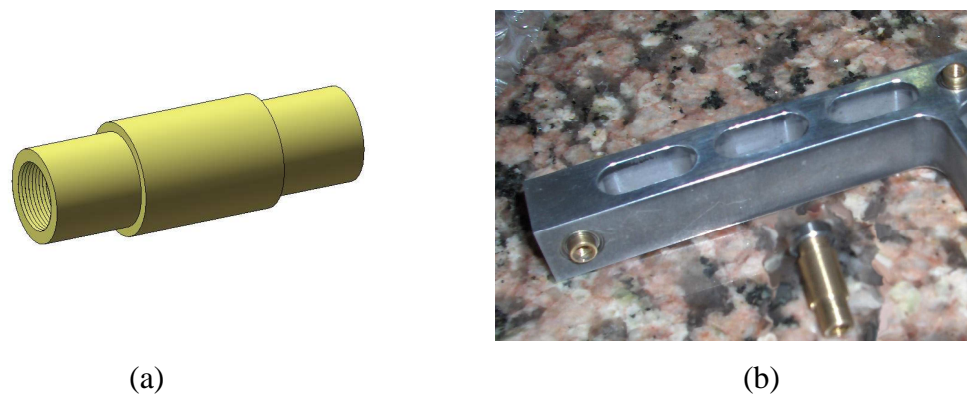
Shafts of the mechanism: (a) CAD representation of shafts with M4 screw thread, (b) View of the bearings on shaft
